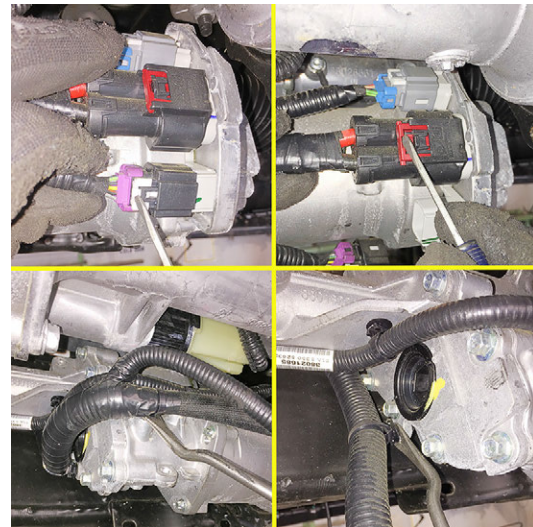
Illustration 2415) RACK AND PINION STEERING...
